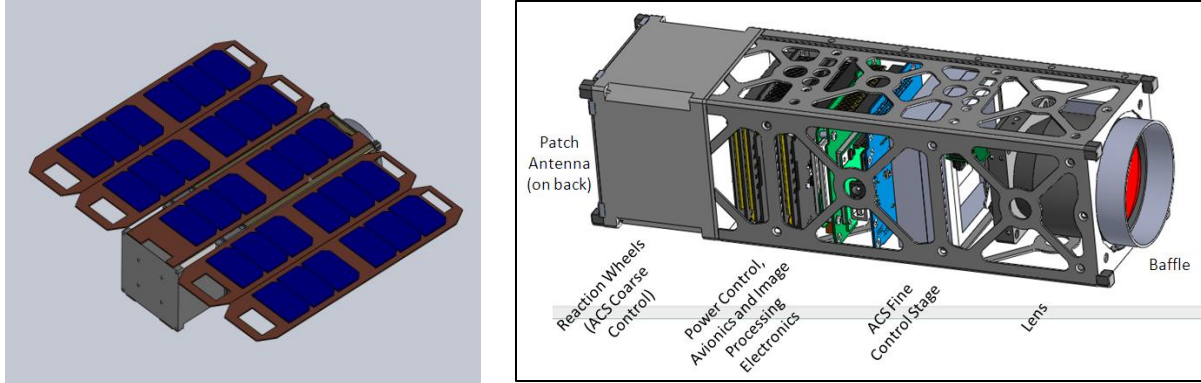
ExoplanetSat CAD model, showing deployed solar panels and internal components.
